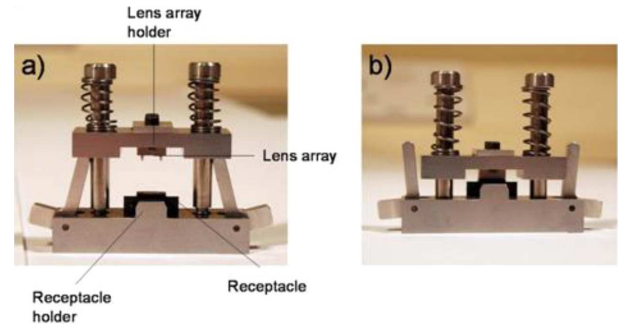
Mechanical lens assembly jig designed to align the lens array into the custom receptacle. (a) Open position. (b) Engaged position.
